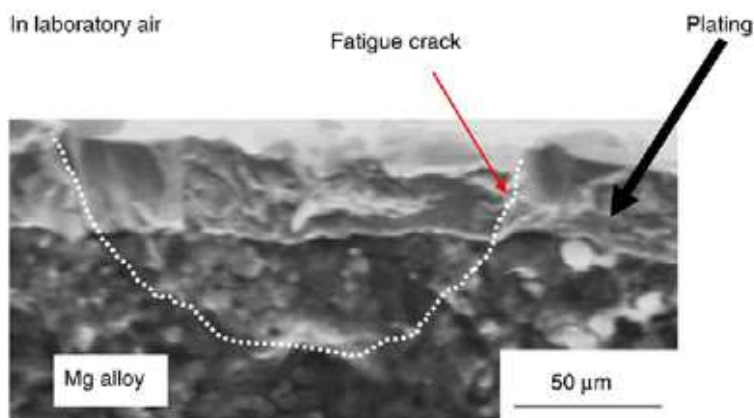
Fracture surface of the electroless Ni plated specimen, failed at  $2.23 \times 10^5$  cycles and stress amplitude of 135 MPa in laboratory air.
